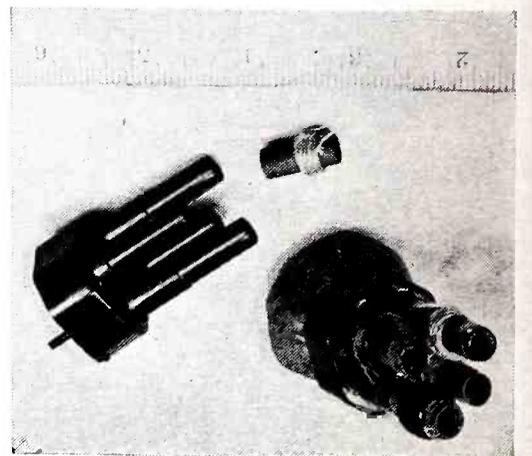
The i-f coils are slipped over the posts on the molded piece at right to form the complete assembly at left
